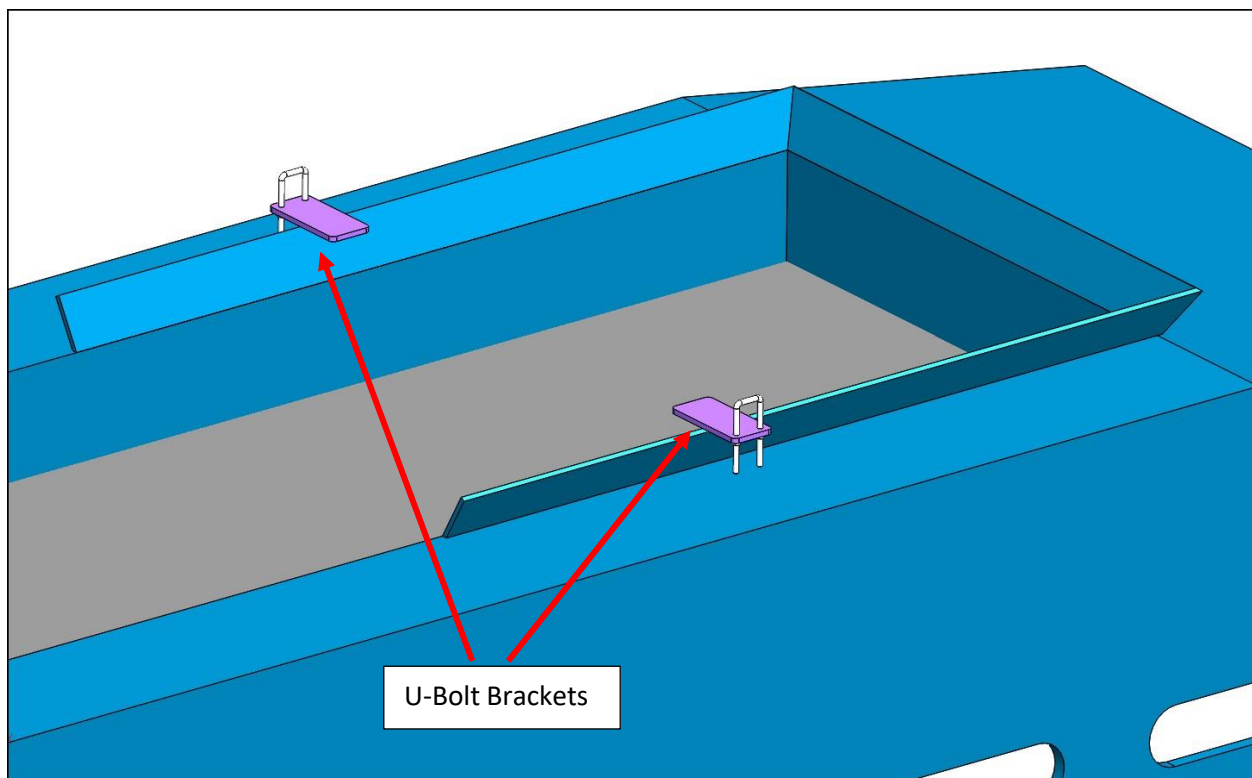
Showing U-Bolt Brackets (Purple) Welded to the Conveyor Structure (Blue)
